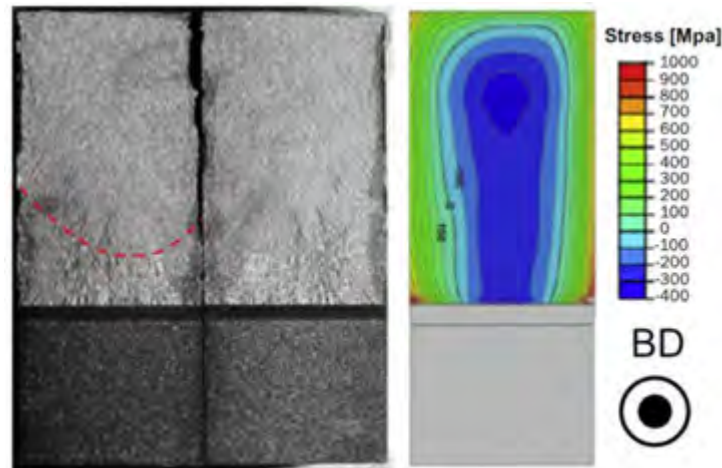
Crack front profile and stress field of fracture surface [89].
